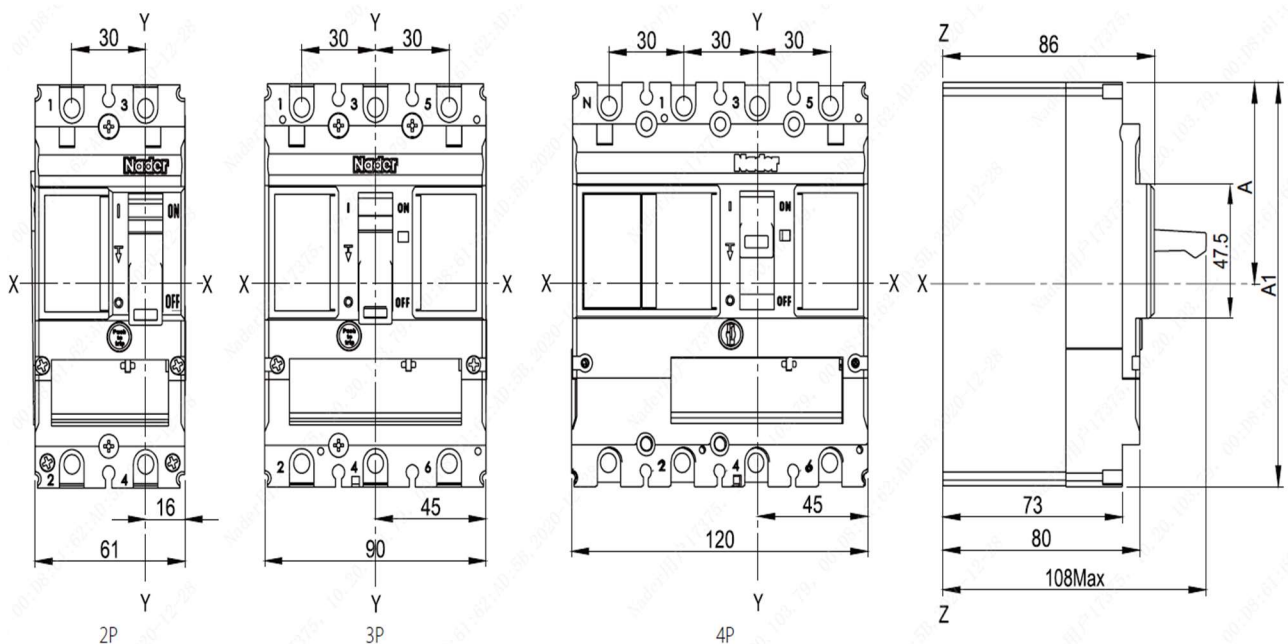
2P、3P、4P Overall dimensions of front board wiring products
